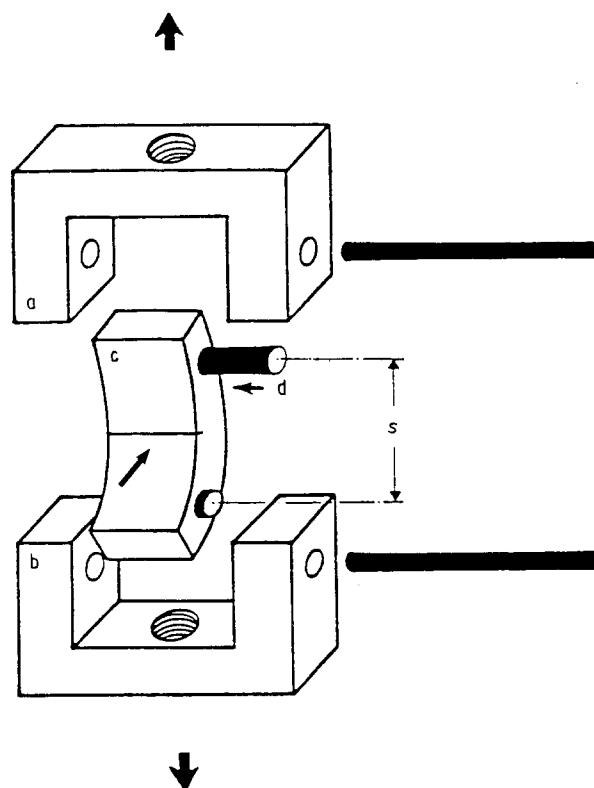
Schematic drawing showing gripping fixtures, a, b, test specimen, c, reinforcing sleeves, d, and distance, s, between loading holes.
